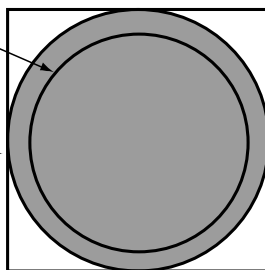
Footprint - 5 mils stencil -non solder mask defined
